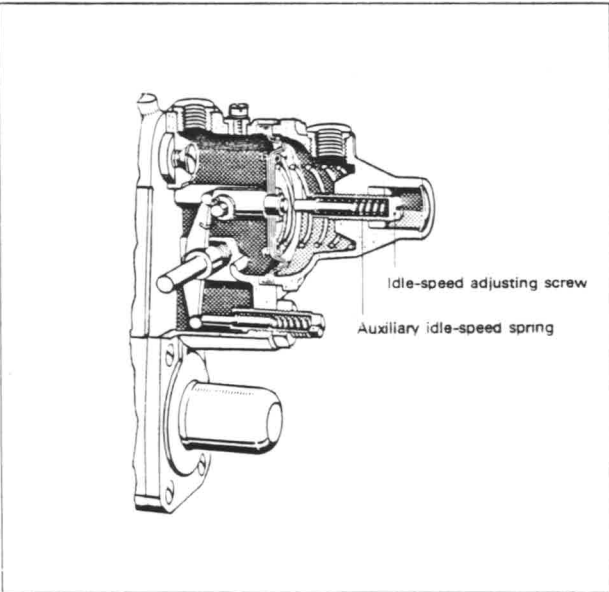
Schematic drawing of a pneumatic governor; diaphragm block with auxiliary idle-speed spring and switching cam.
